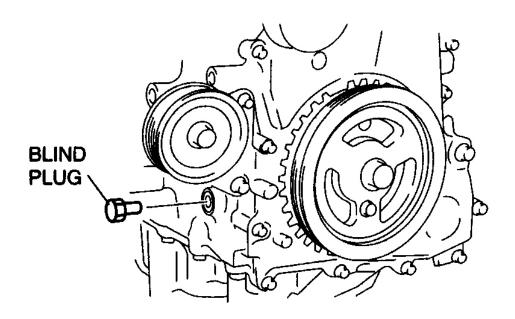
Installing Engine Front Cover Upper Blind Plug Courtesy of MAZDA MOTORS CORP.
